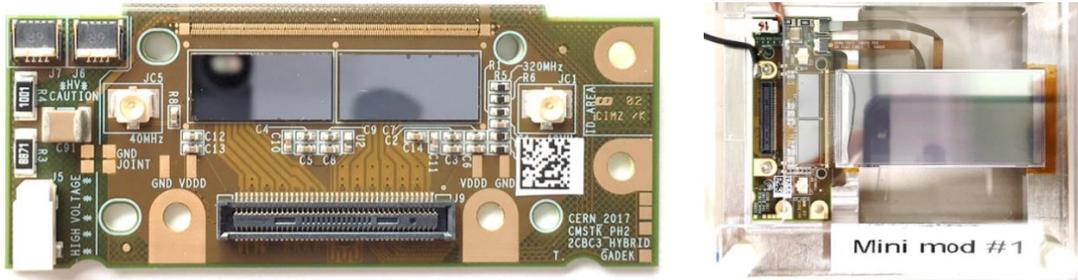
A picture of a produced hybrid with 2 CBC3 ASICs (left), and a picture of a mini module built with that hybrid (right).
